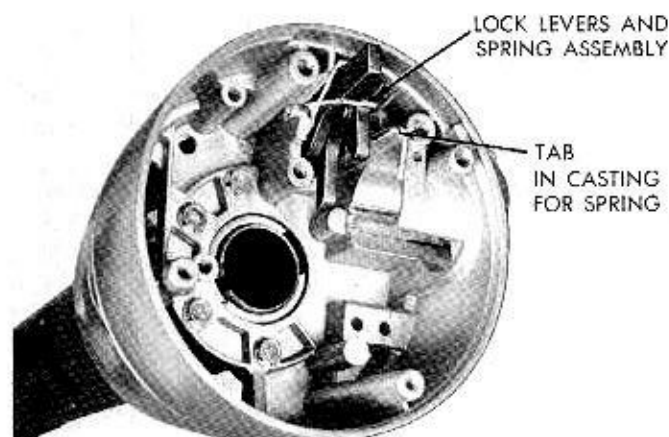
Lock Levers and Spring Assembly Installed in Housing
